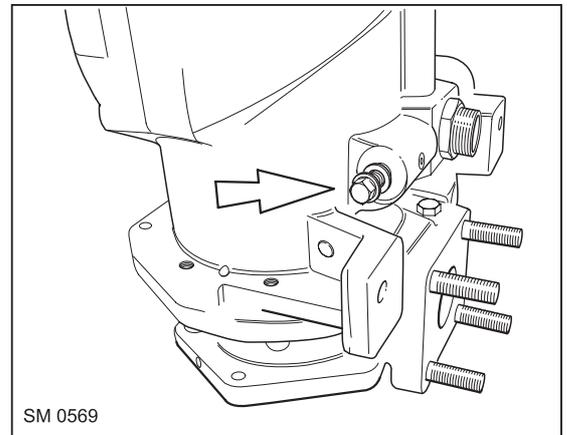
Removing G  $\frac{1}{8}$ " Plugs and Seals
